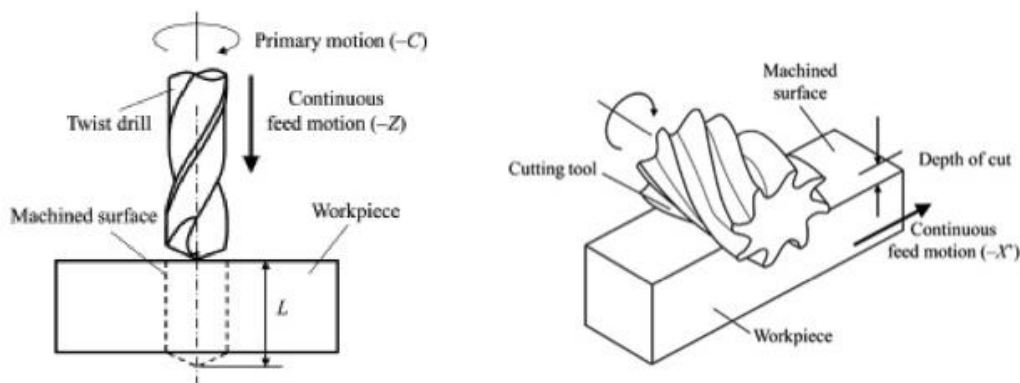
Two types of machining processes. The one to the left is drilling and the one to the right is milling (Nee, 2014, p. 826 and p. 830)
